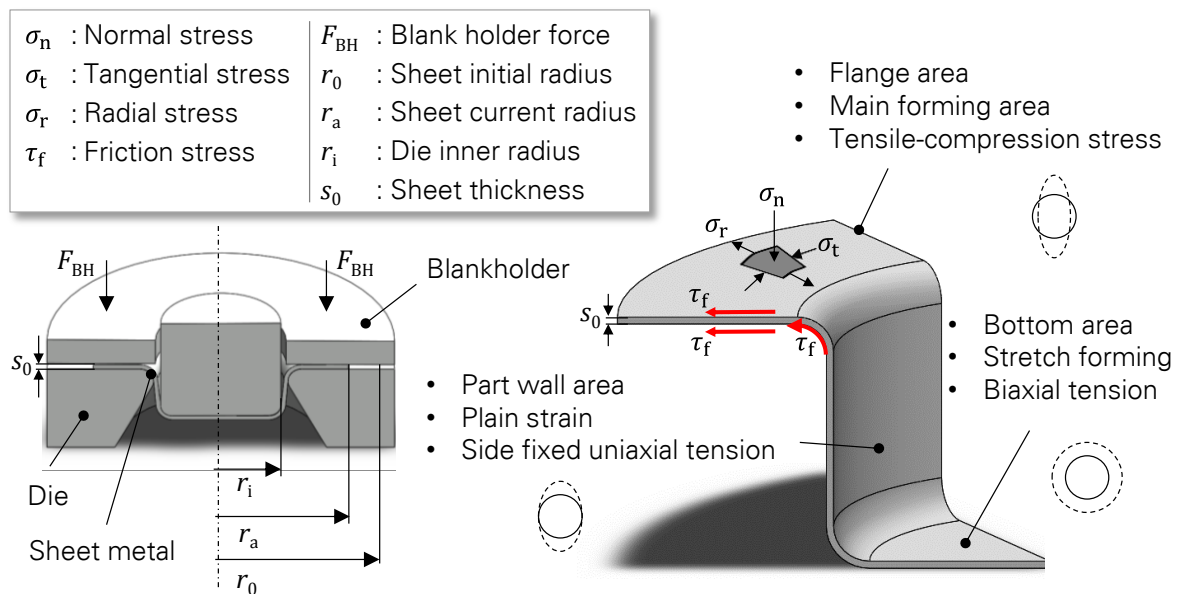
Deep drawing mechanism, geometrical variables, and acting stresses [10]
